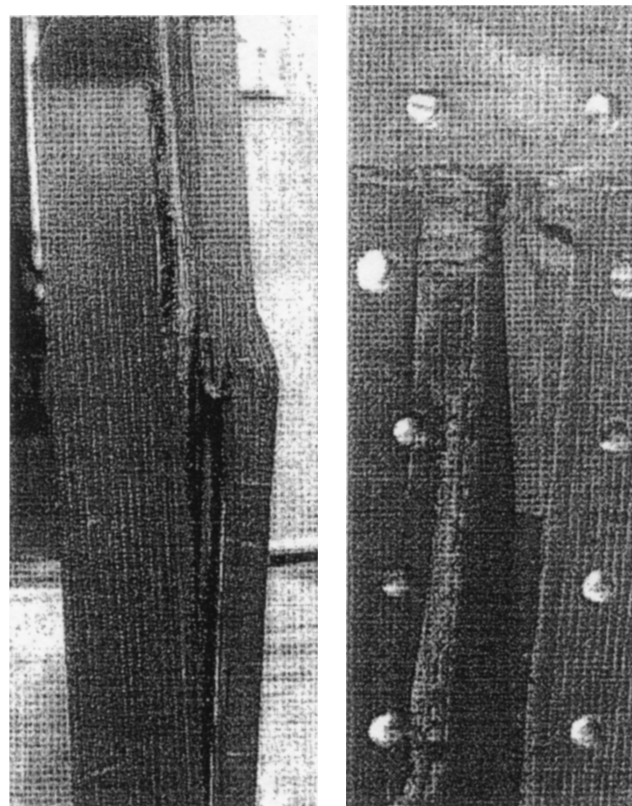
Photographs of the upper S/RFI composite panel showing the failure damage: a) side view showing failure in the skin and the debonding between the stringer flange and the skin b) close-up of the delamination of one of the outer stringers.
